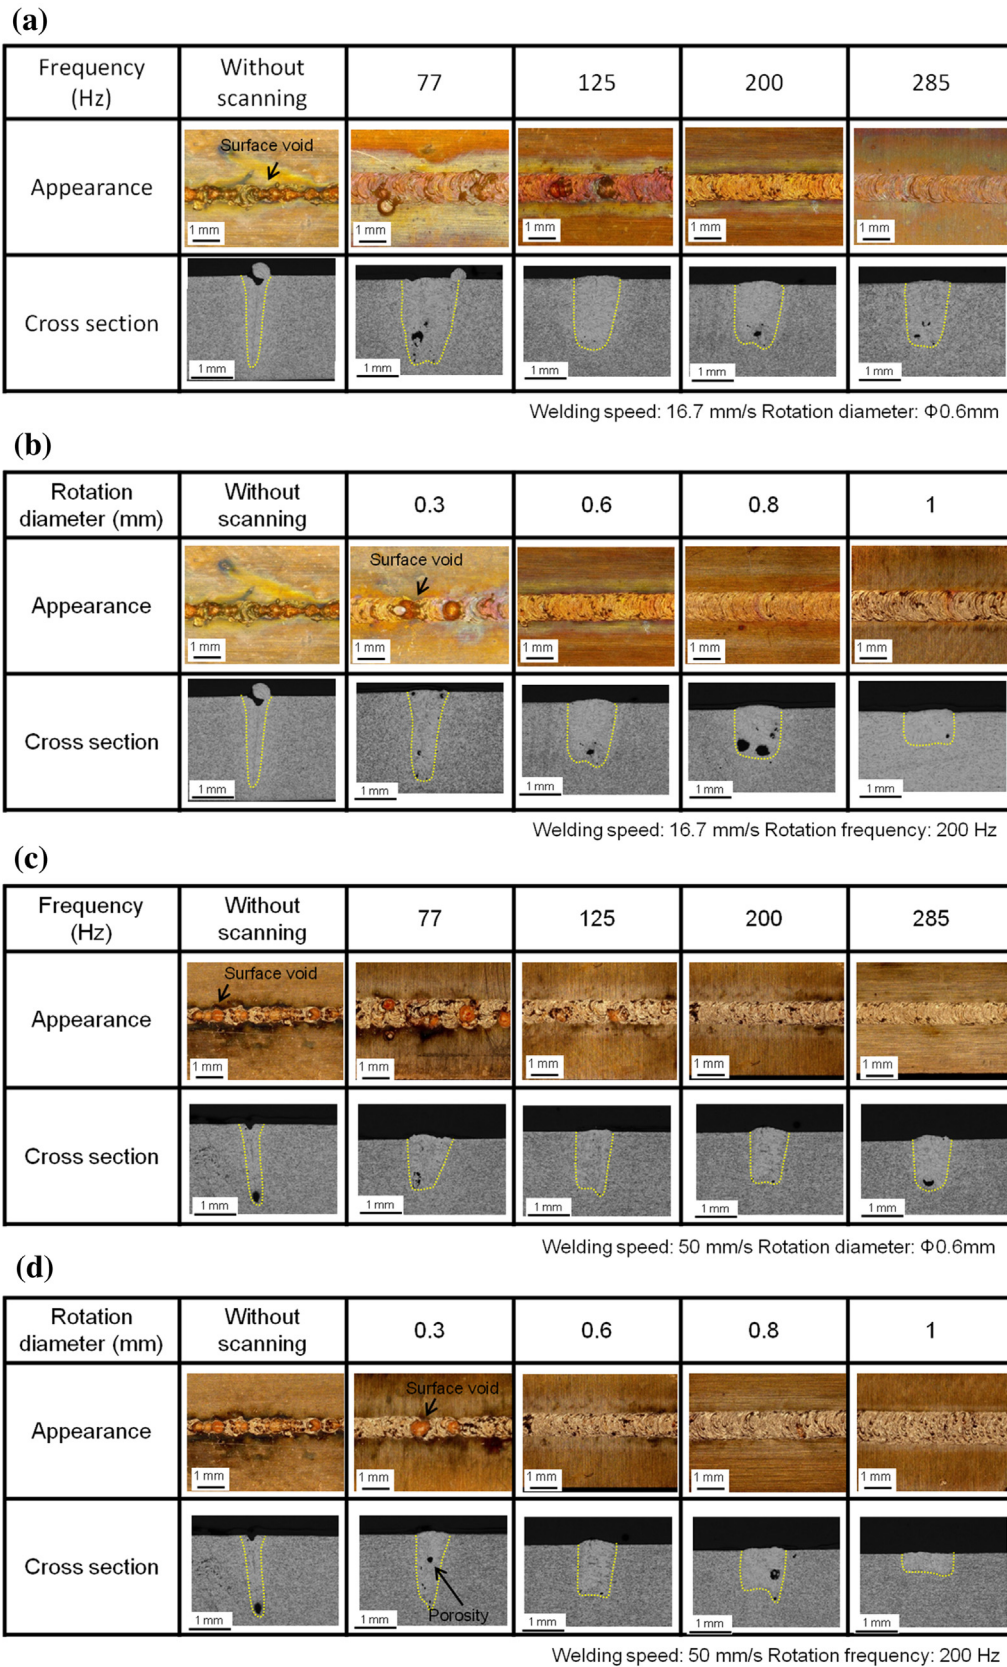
(a). Appearance and cross section obtained with welding speed = 16.7 mm/s and rotation diameter $\phi = 0.6$ mm (laser power = 1500 W, Df = 0 mm). (b). Appearance and cross-section obtained with welding speed = 16.7 mm/s and rotation frequency = 200 Hz (laser power = 1500 W, Df = 0 mm). (c). Appearance and cross-section obtained with welding speed = 50 mm/s and rotation diameter $\phi = 0.6$ mm (laser power = 1500 W, Df = 0 mm). (d). Appearance and cross-section obtained with welding speed = 50 mm/s and rotation frequency = 200 Hz (laser power = 1500 W, Df = 0 mm).
